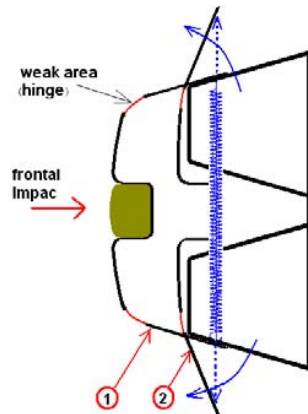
section view of bumper – cover and spring movement during frontal impact
